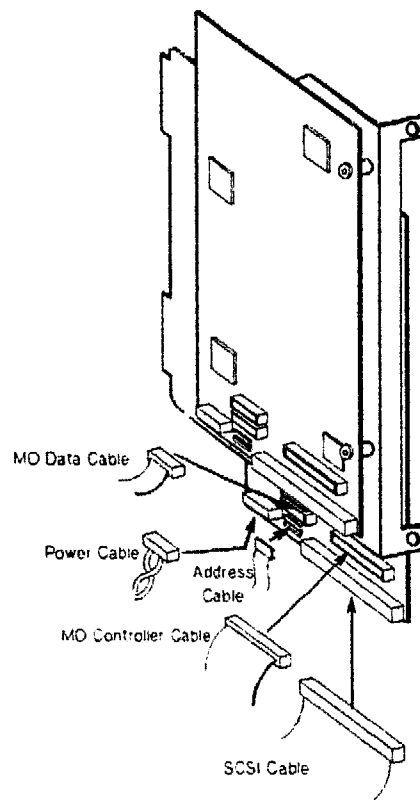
Number 2 Drive Controller PCA Cable Connections
